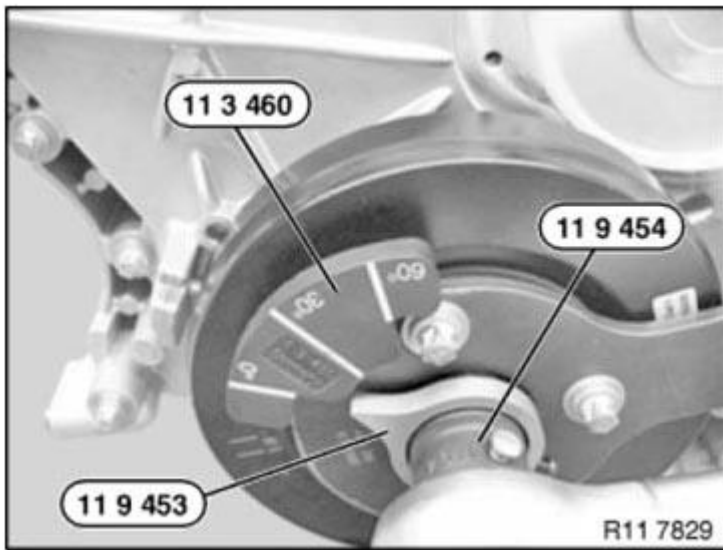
Adjusting Special Tool 11 9 453 On Special Tool 11 9 454 Using Clamping Screw To 0° On Scale
